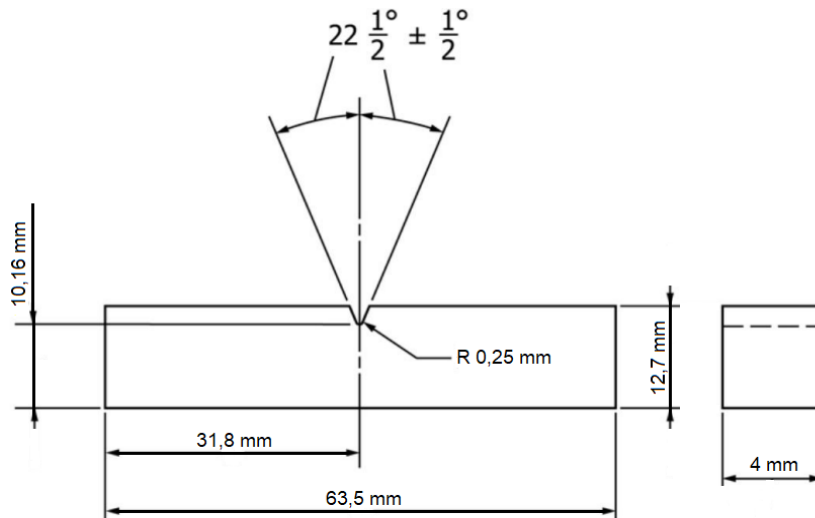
Example of specimen for Izod type C tests (ASTM D256).
